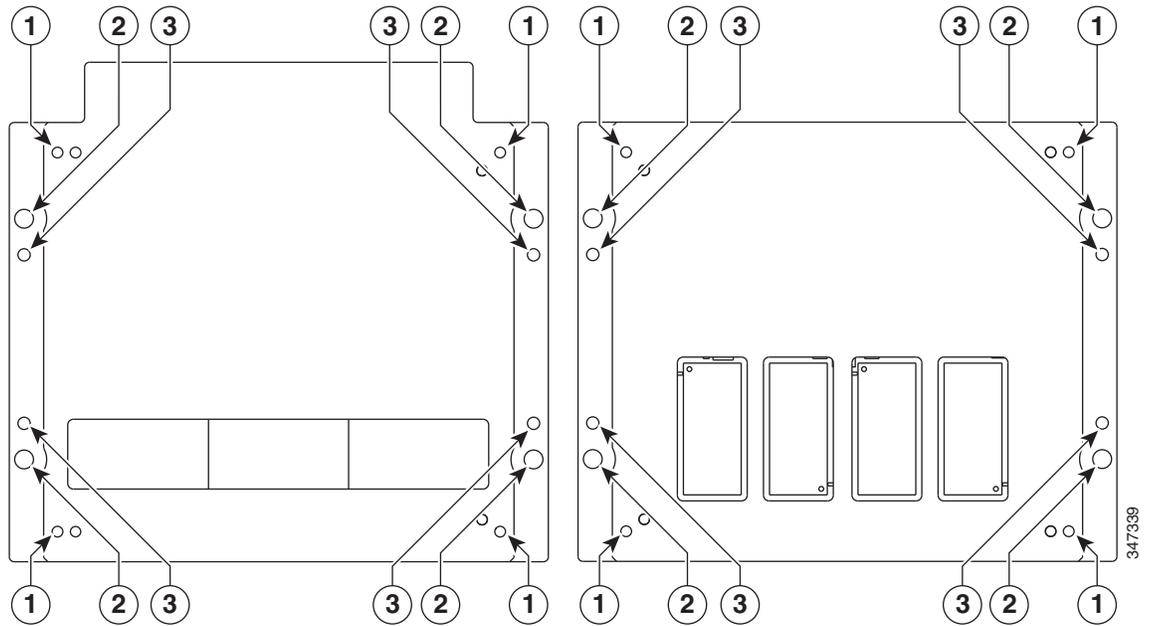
(#) illustrates the card retainer mounting concept. These card retainers hold the board inside a chassis (via slots) and transfer heat away from the Cisco ESS-2020 thermal plate.
